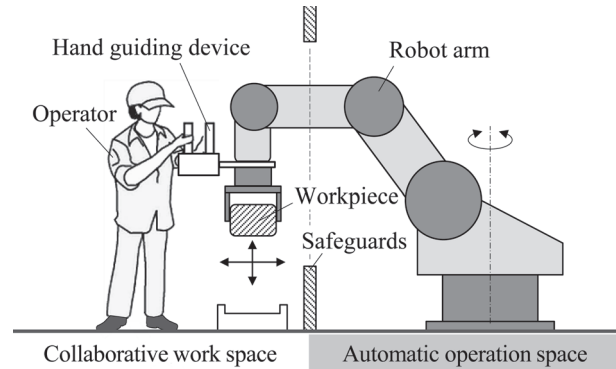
Example of workpiece feeding operation by using hand guiding device⁵⁾.
